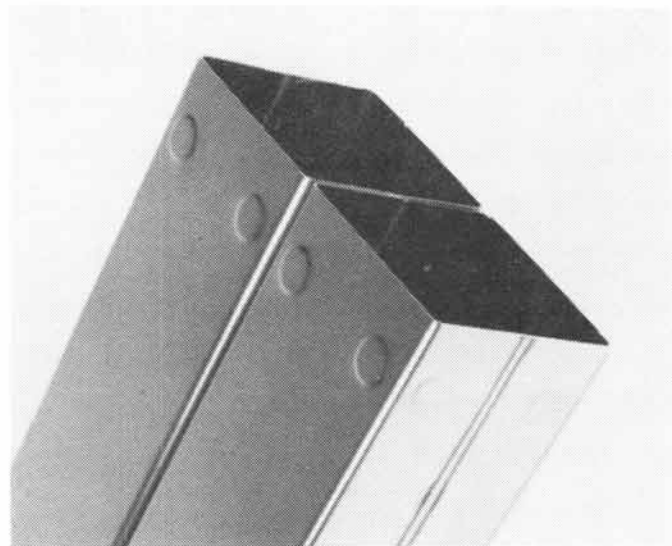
Fabricated spent fuel storage channels-produced from NeutroSorb Plus strip containing 1.4 wt.% boron. Photo shows two 157 mm. by 157 mm square channels spot welded together.
